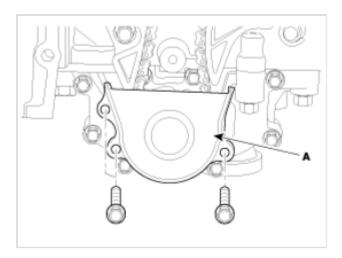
Identifying Oil Pump Chain Cover With Mounting Bolts
